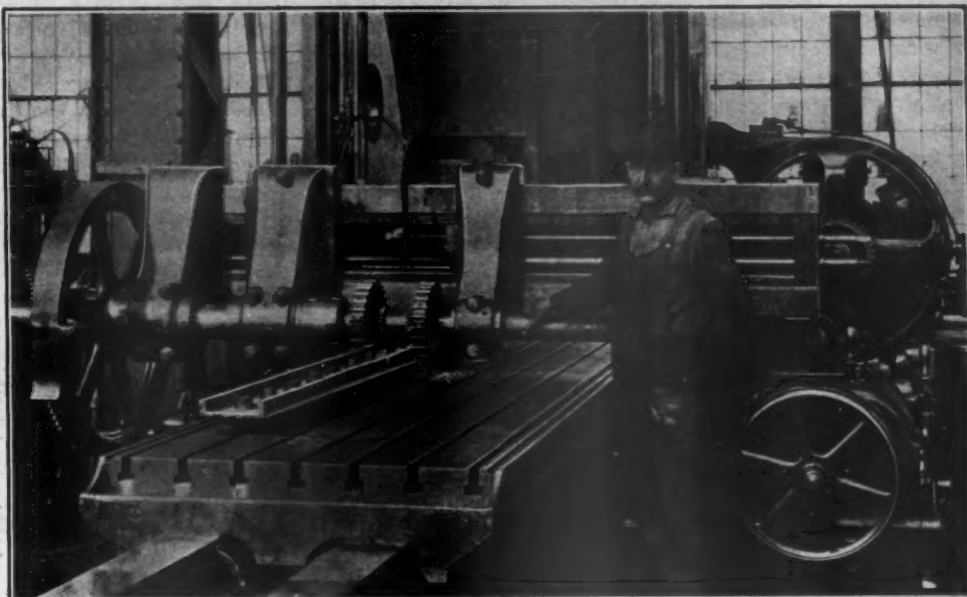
FINISHING THE TOPS AND OUTSIDES OF THE FLANGES OF CAST STEEL CROSS-HEAD SHOES.
